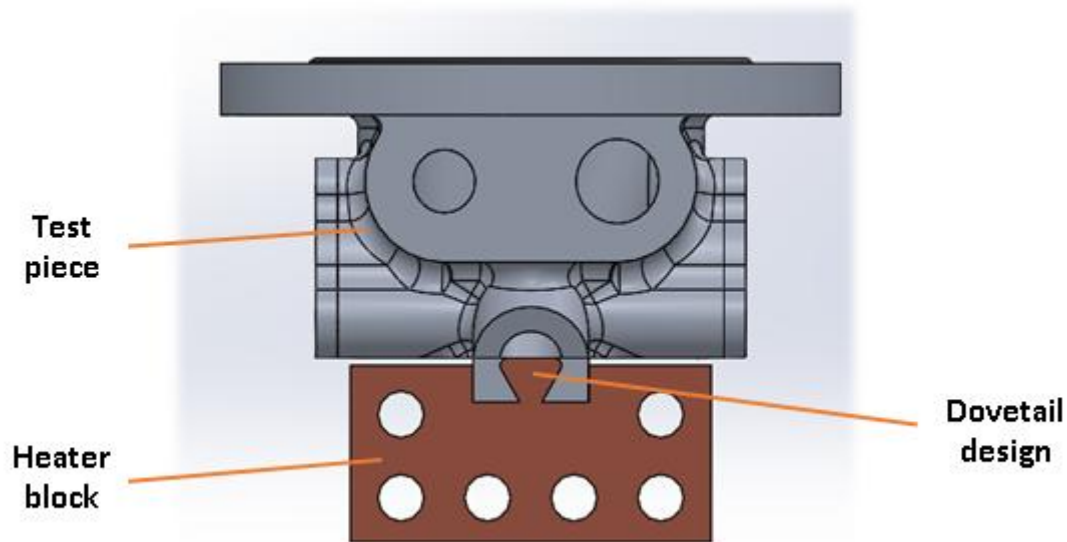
Heater block and test piece assembly showing the dovetail design.
